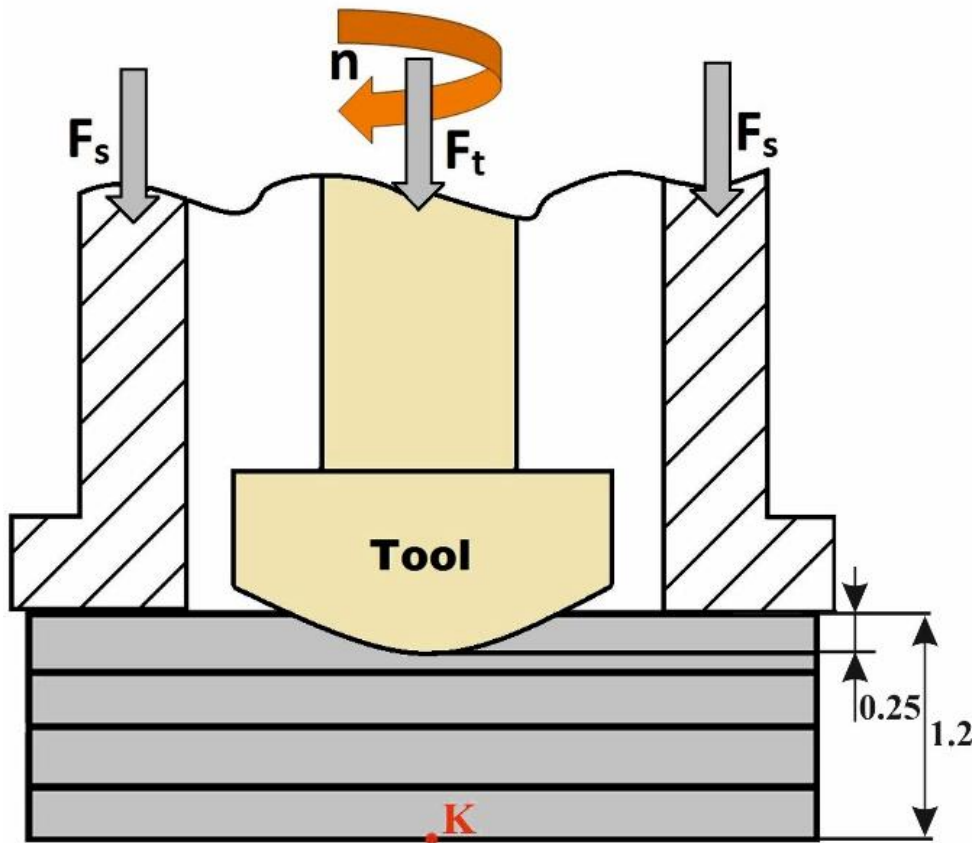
FSSW tool setup F_t force on the tool, F_s clamping force (all dimensions are in mm)
